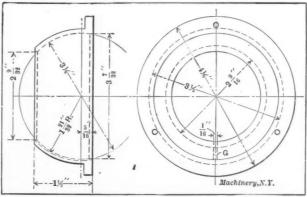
Casting which is held in the Fixture, Fig. 5, while a Groove is being milled in its Spherical Surface
